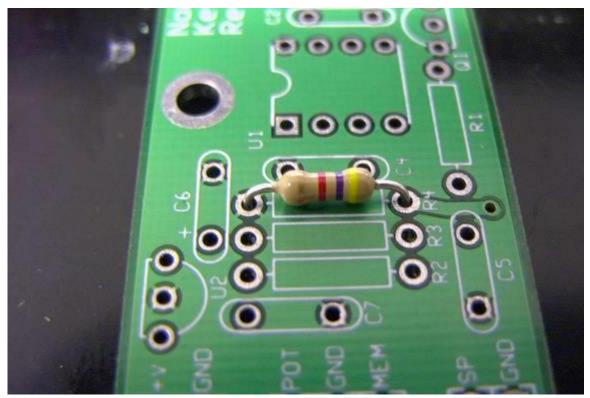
Resistor in place ready to solder. Notice how nicely it fits? You can do it too! You will be amazed when you find out how easily it is done. I usually bend the leads on the back side of the board at a 45 degree angle to hold the resistor in place so that it doesn't fall out when I turn the board over to solder. ©
